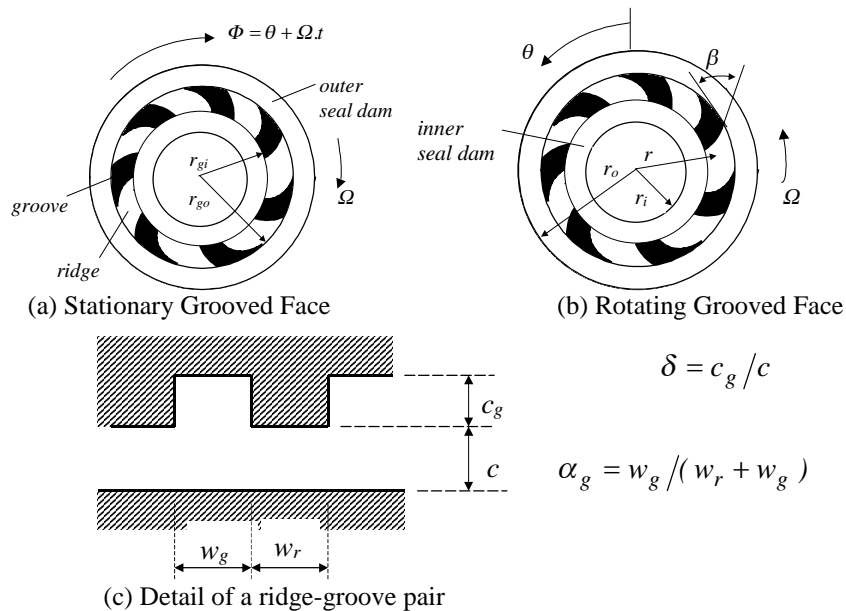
Geometry and physical parameters of a SGGFS with rotating and stationary grooved surfaces
